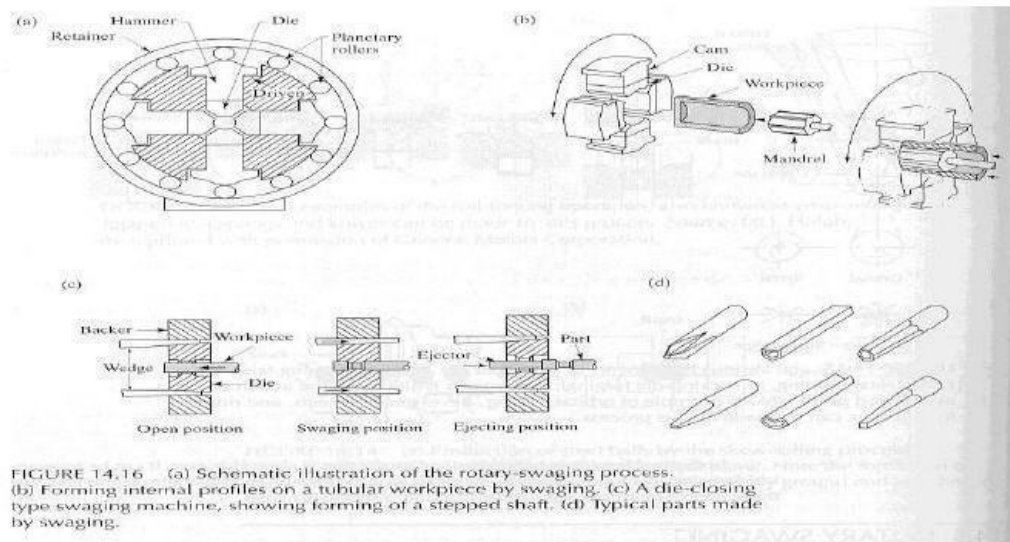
(a) Schematic illustration of the rotary-swaging process. (b) Forming internal profiles on a tubular workpiece by swaging. (c) A die-closing type swaging machine, showing forming of a stepped shaft. (d) Typical parts made by swaging.
